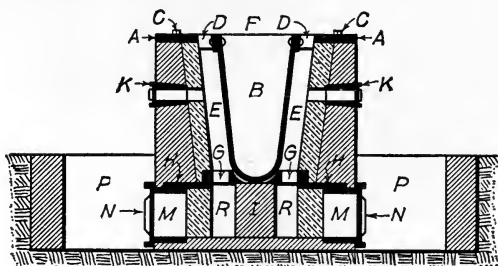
VERTICAL CROSS SECTION OF KETTLE AND FURNACE
